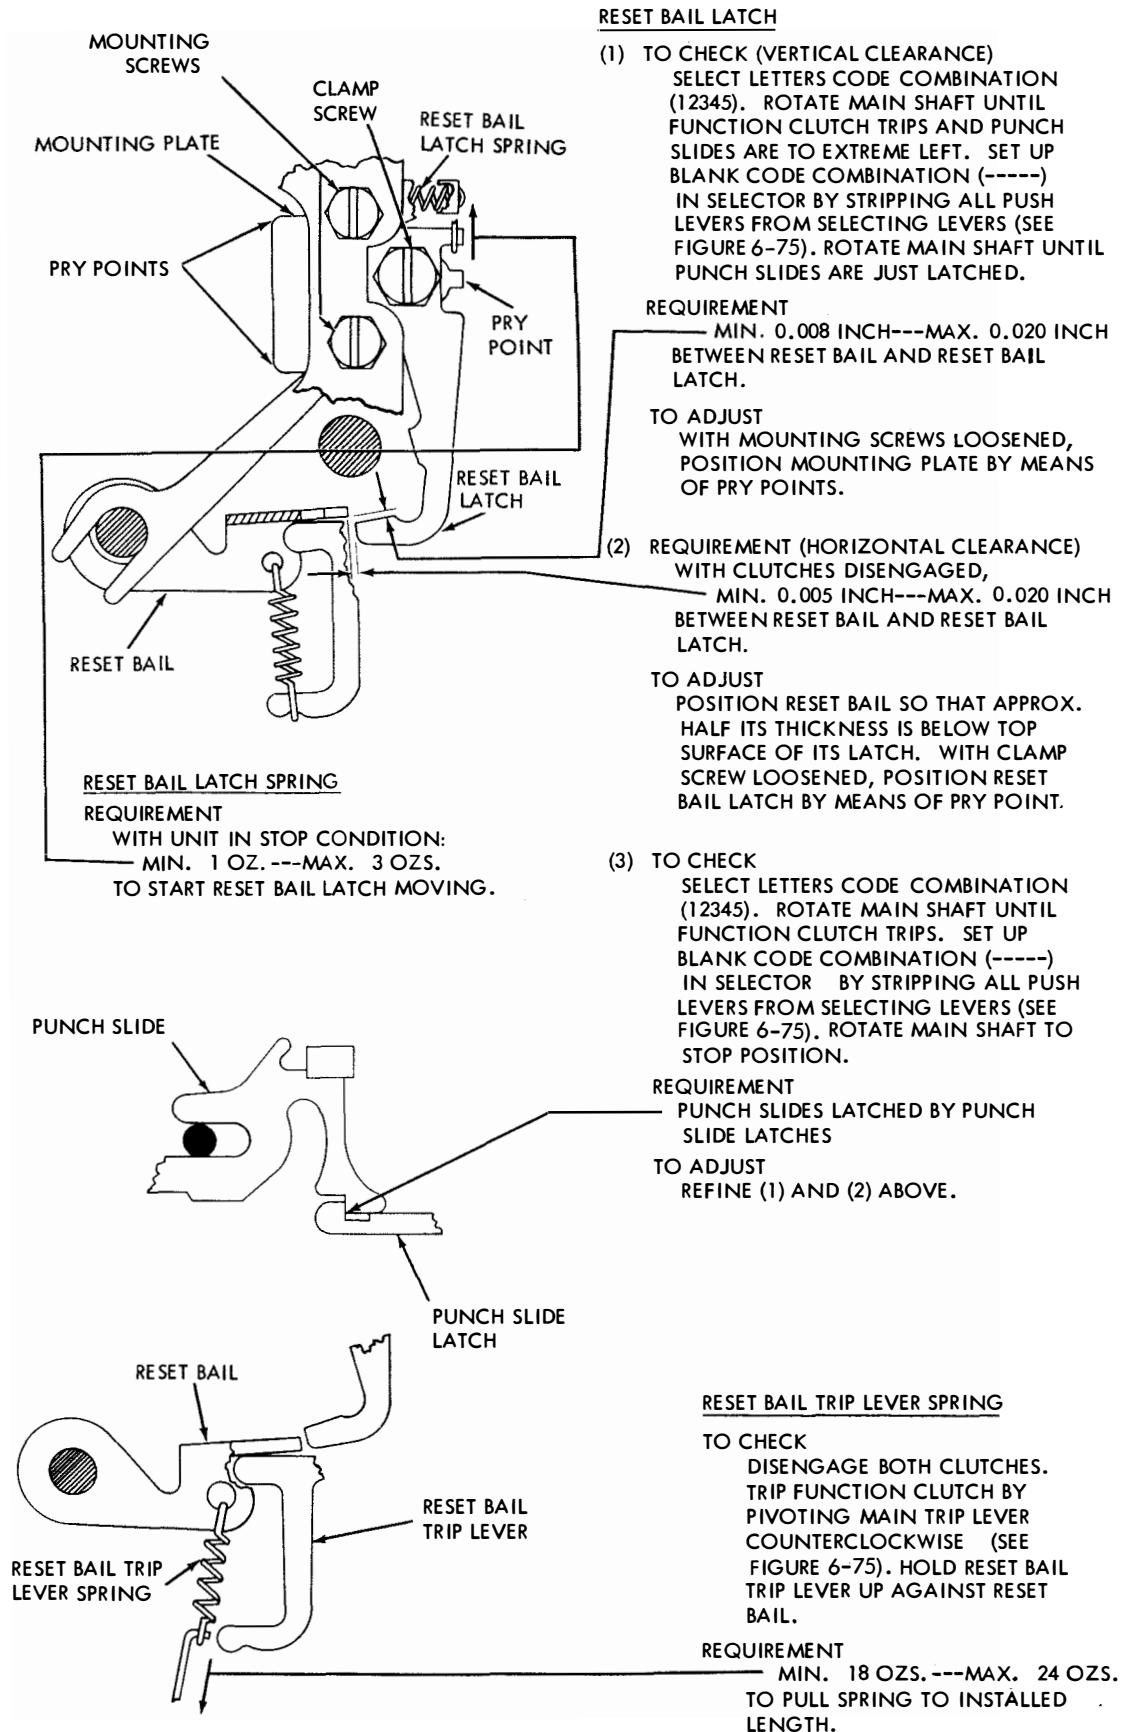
Letters Tape Feed-Out Mechanism (TT-192A/UG and TT-253A/UG)
